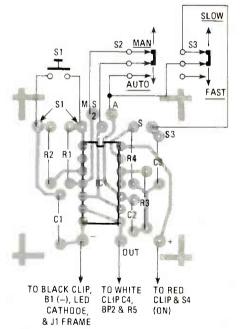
PARTS PLACEMENT DIAGRAM also indicates connections to components mounted on- and off-board.
